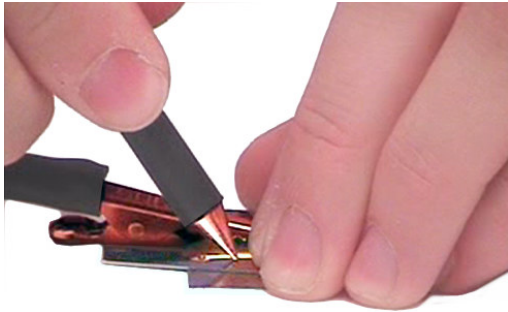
The single probe hand piece (SPHP) being used to weld thin sheet metal.
